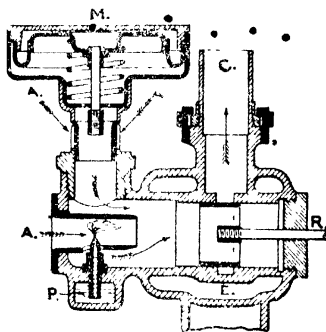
Float feed jet carburettor with diaphragm controlled supplementary air and piston-mixture throttle—Kiehl.
